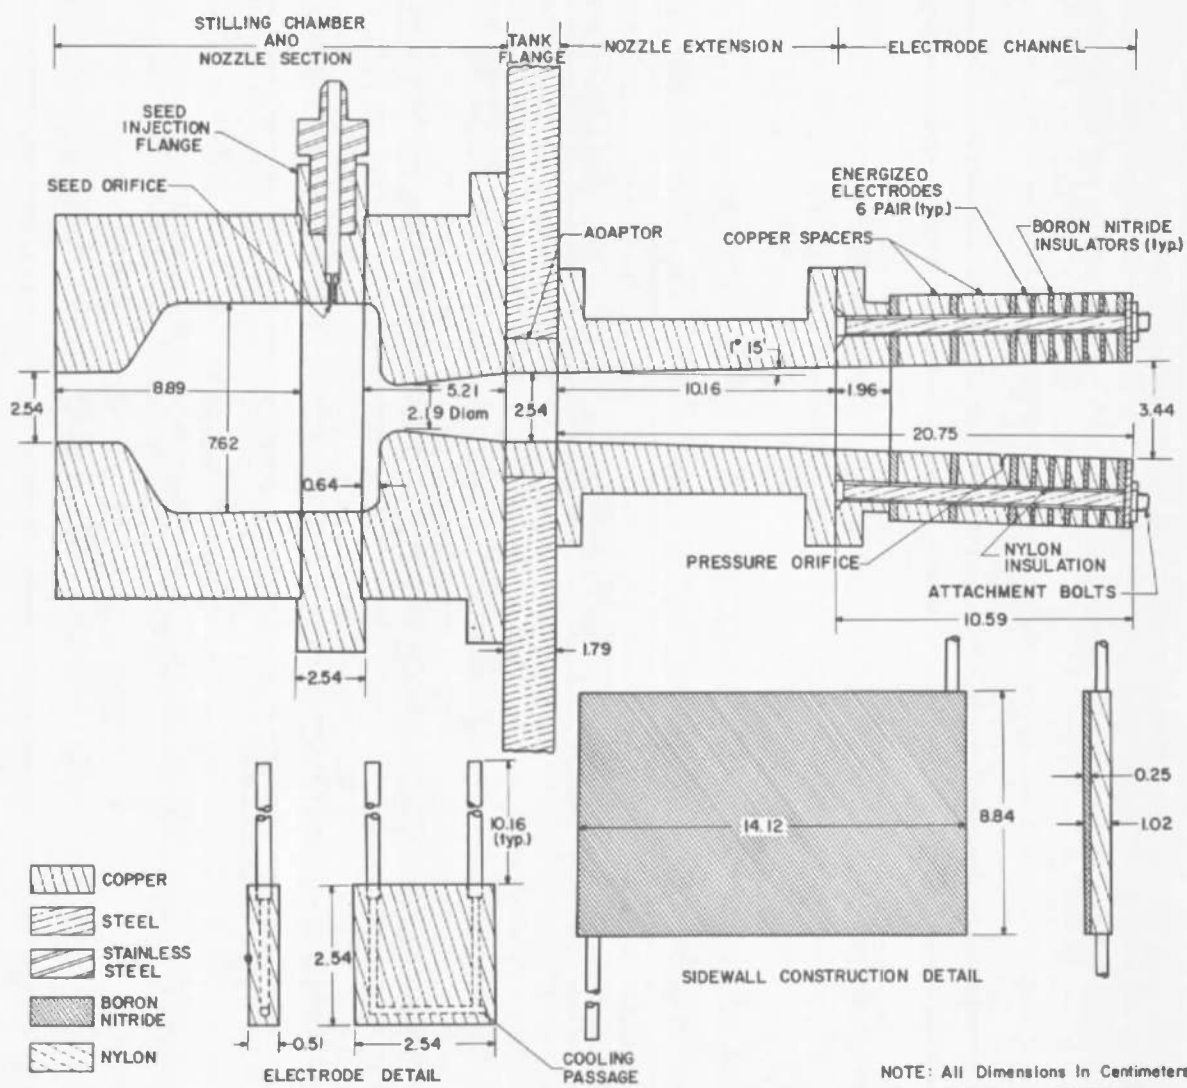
Schematic of Channel 2 Mounted on the Stilling Chamber, Seeding Flange, Nozzle, and Nozzle Extension Assembly
